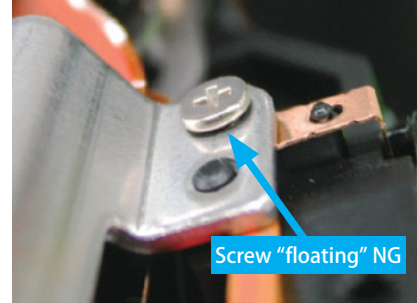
Auto Focus FPC Ass'y Assembly 6
